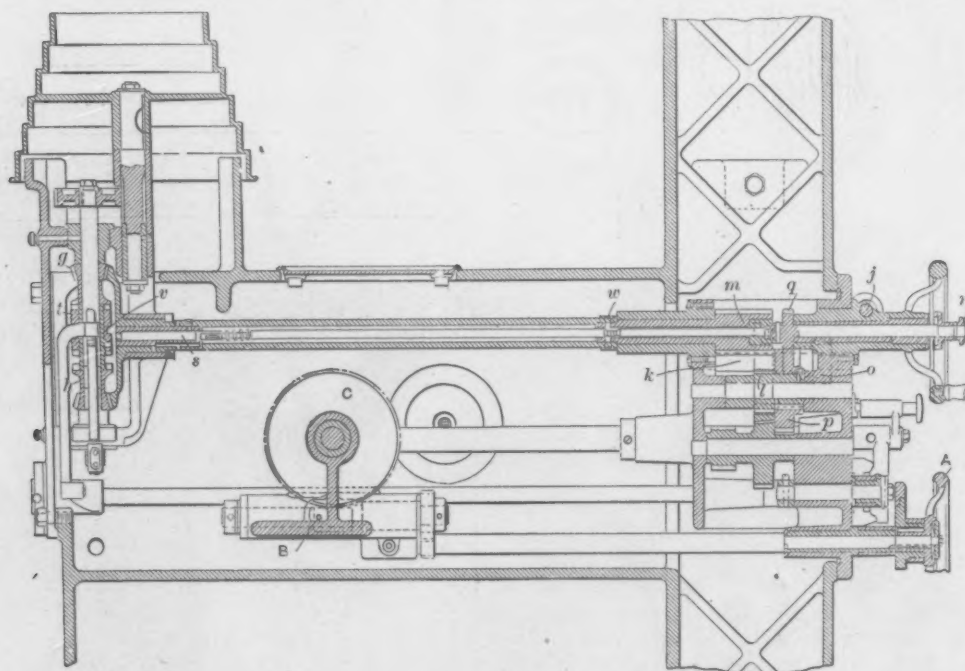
Plan View of the Machine, Showing the Feed Gearing for the Table Traverse.
